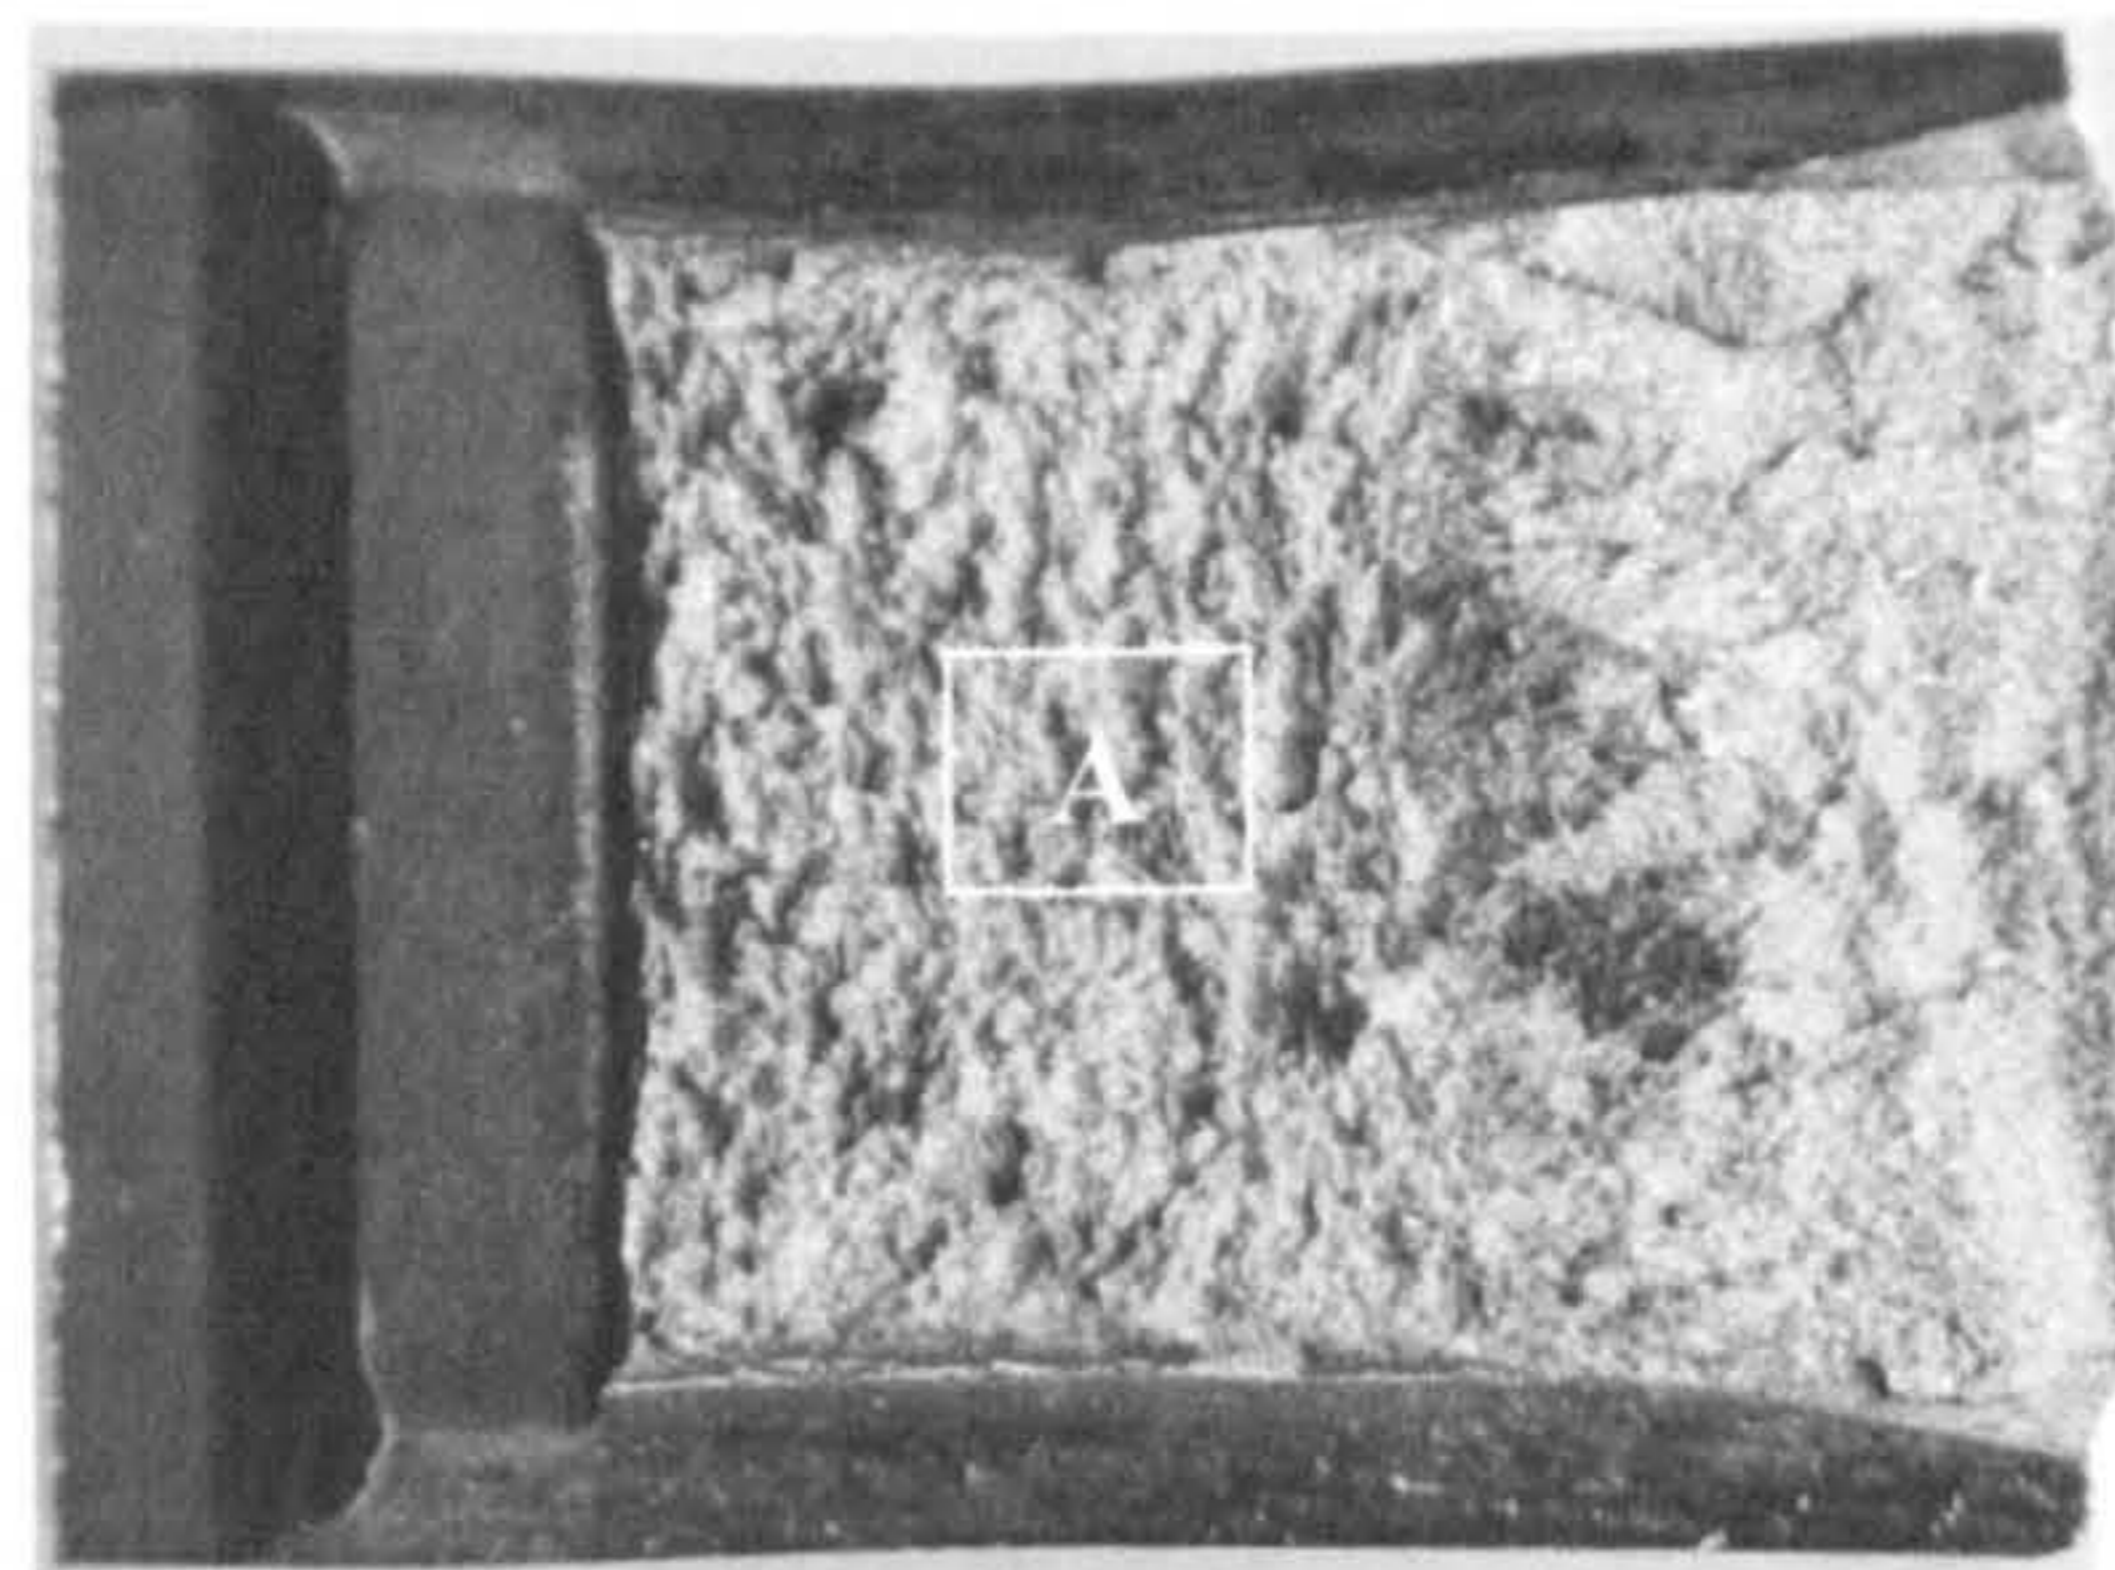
Macroscopic fracture surface of C(T) specimen.
